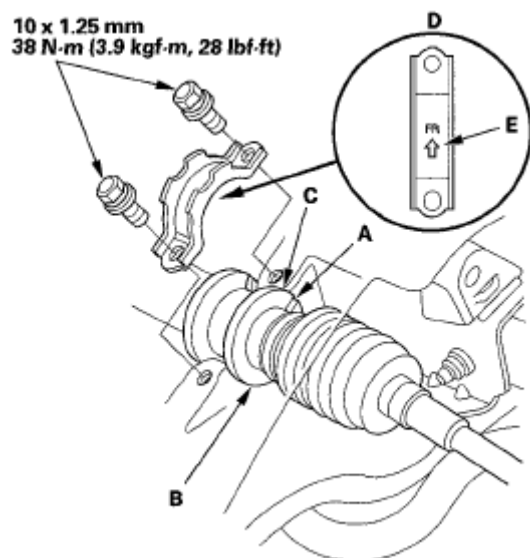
Aligning Slit Of Gearbox Mounting Rubber, Rear Bracket
